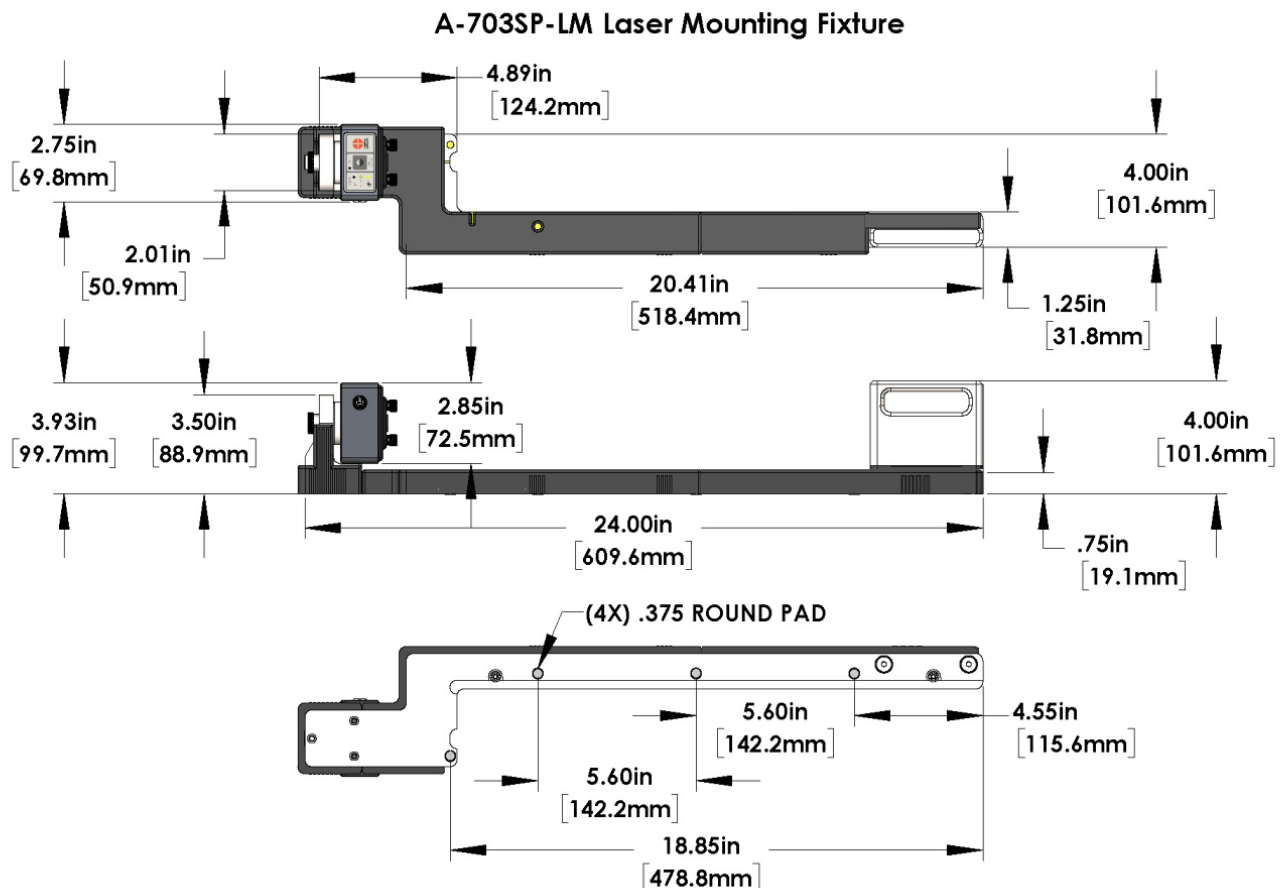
A-703SP-LM Laser Mounting Fixture Dimensions
